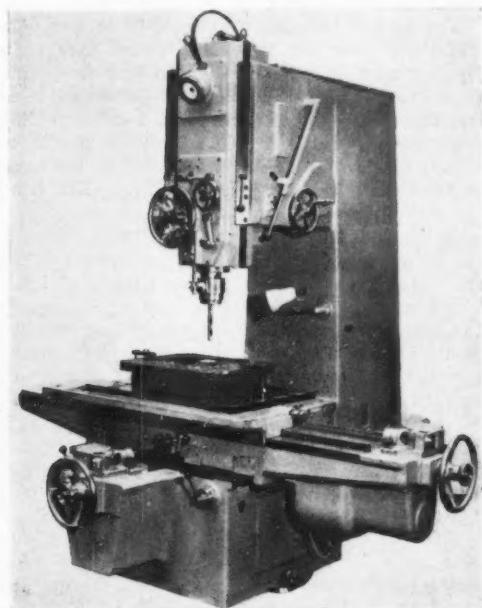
The Buswell & Sweeney jig borer with Master Bar measuring system
